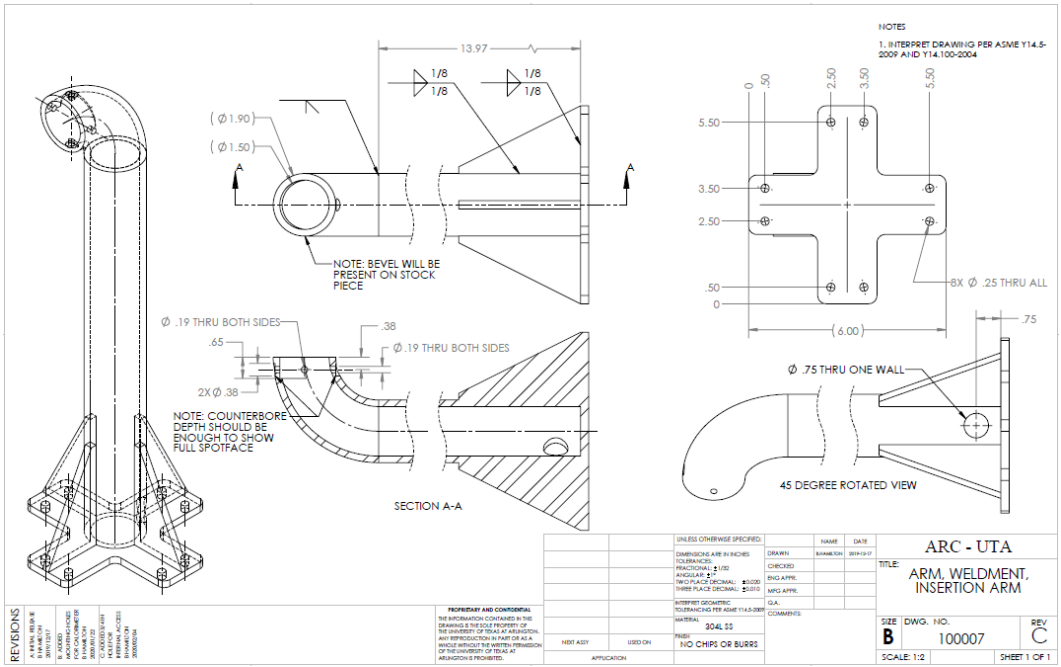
Mach 6 arm drawing (without copper tubing wrap).
